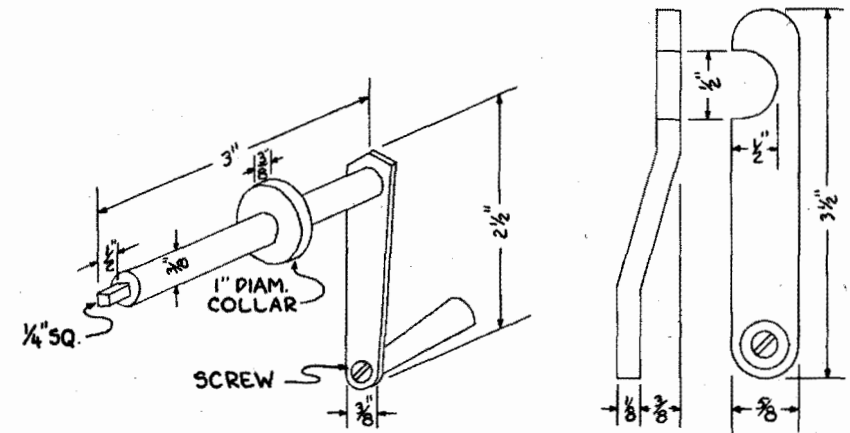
Diagram showing dimensions of crank and crank lock.
